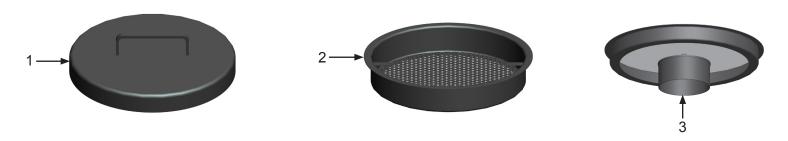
1-1/2" Extractor Abrasive Blasting Pot Moisture Separator
